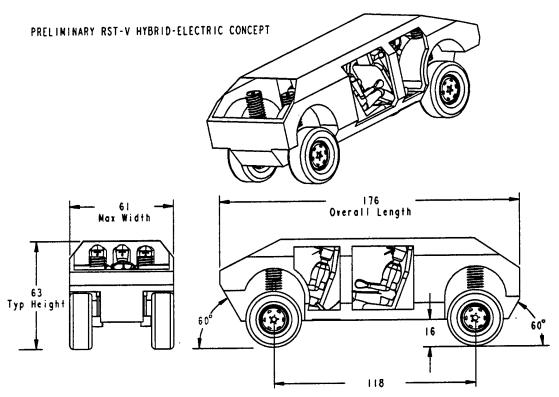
RST Hybrid Electric Drive Vehicle Concept Layout
